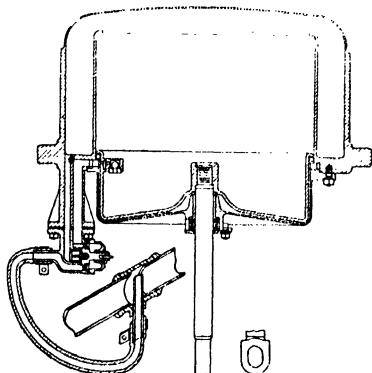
'Prestall' Wrought Steel Vacuum Brake Cylinder with internal ball valve and external release valve. Piston in release position. Air above piston is exhausted through the internal ball valve. The brake pipe connection to cylinder (shown in section) is provided with a siphon to prevent condensed moisture from being drawn into cylinder.
